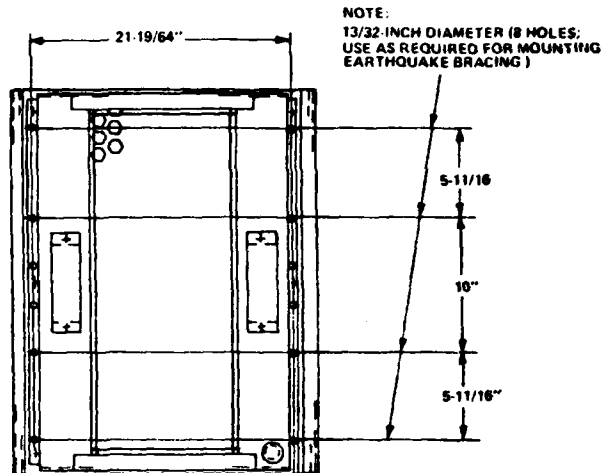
Top View of CEC and PEC, Showing Mounting Holes for Earthquake Bracing.
